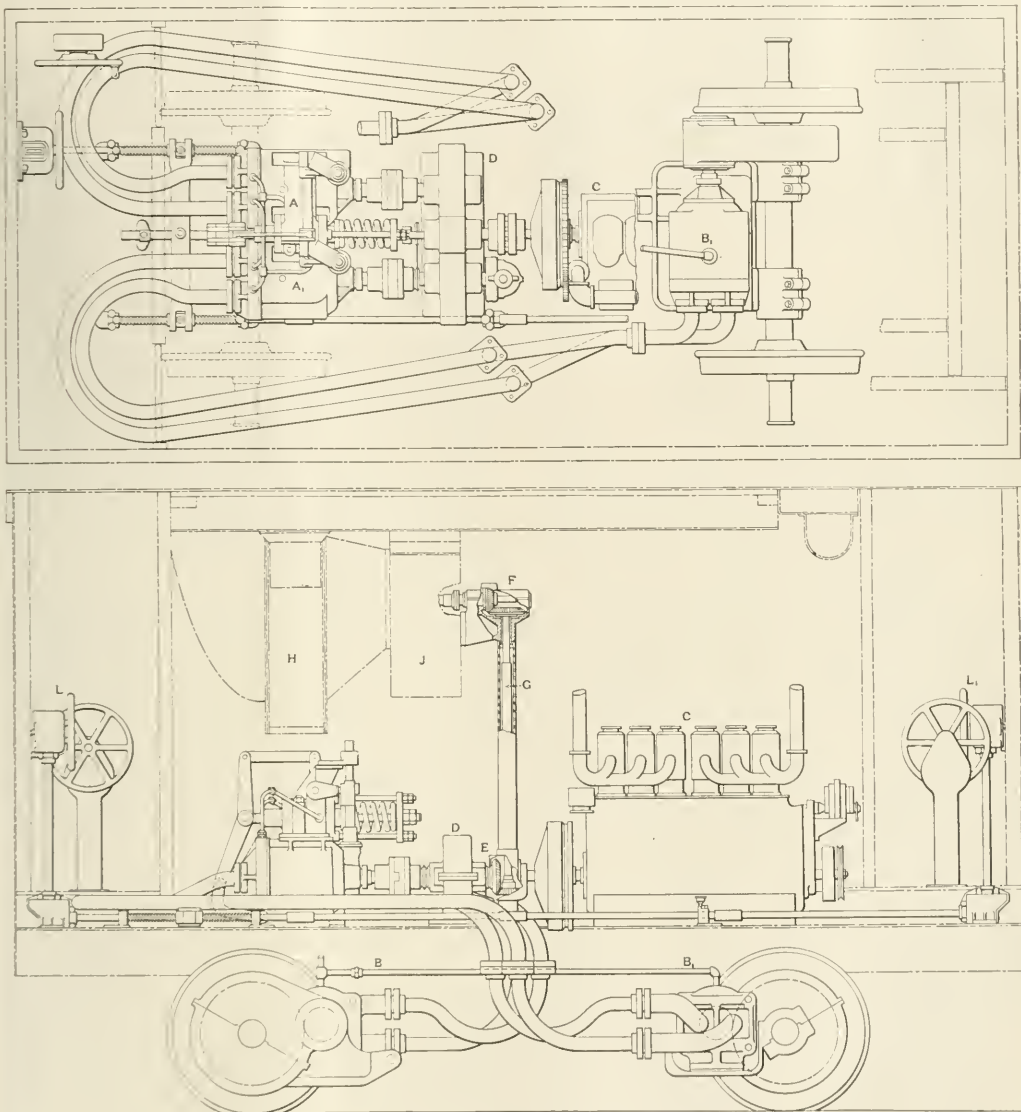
Plan and Elevation of Gasoline-Hydraulic Locomotive
